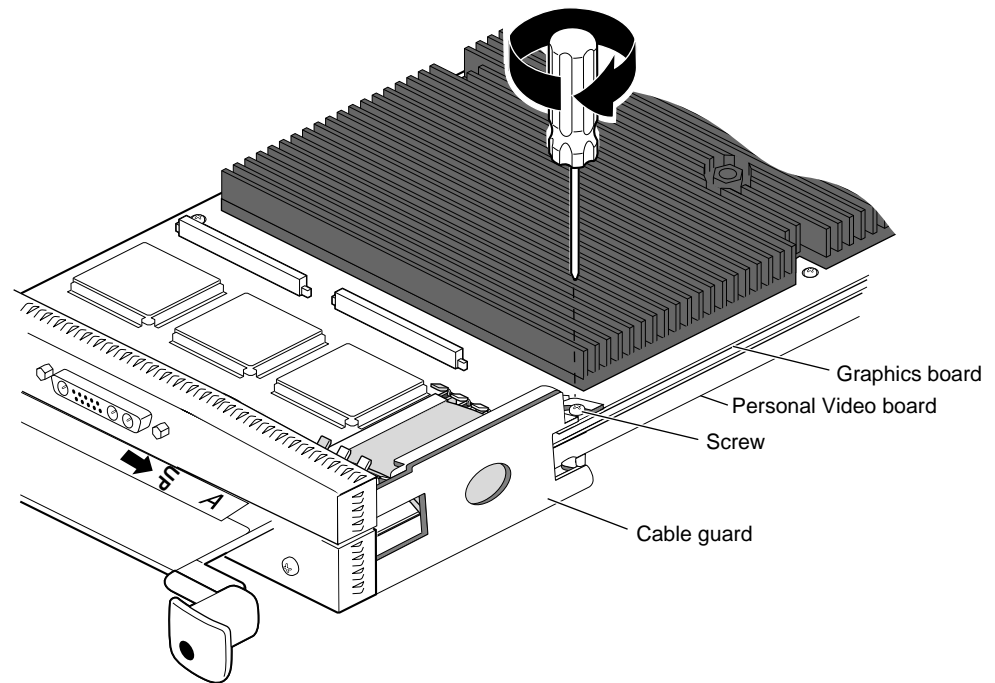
Sliding the Cable Guard Under the I/O Panels
